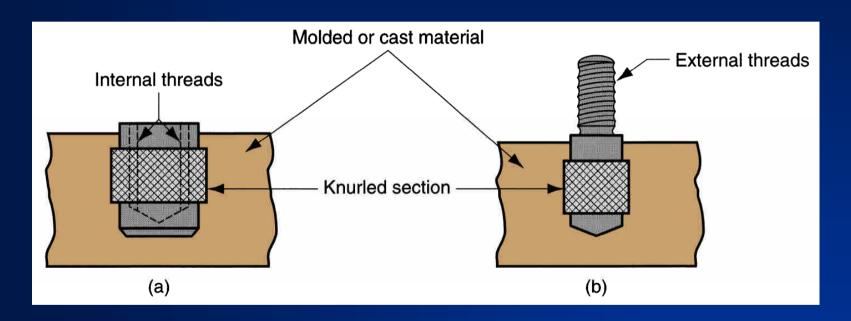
Examples of molded-in inserts: (a) threaded bushing, and (b) threaded stud
